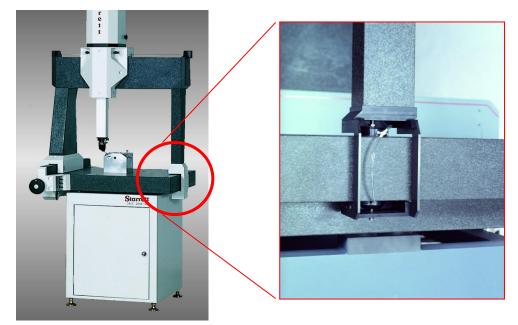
New Way® Air Bearings on a Coordinate Measuring Machine
